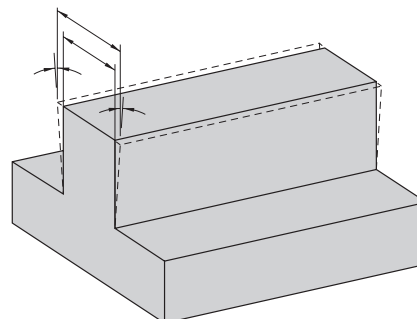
Flatness affects part tolerance more when milling both sides of a part.
